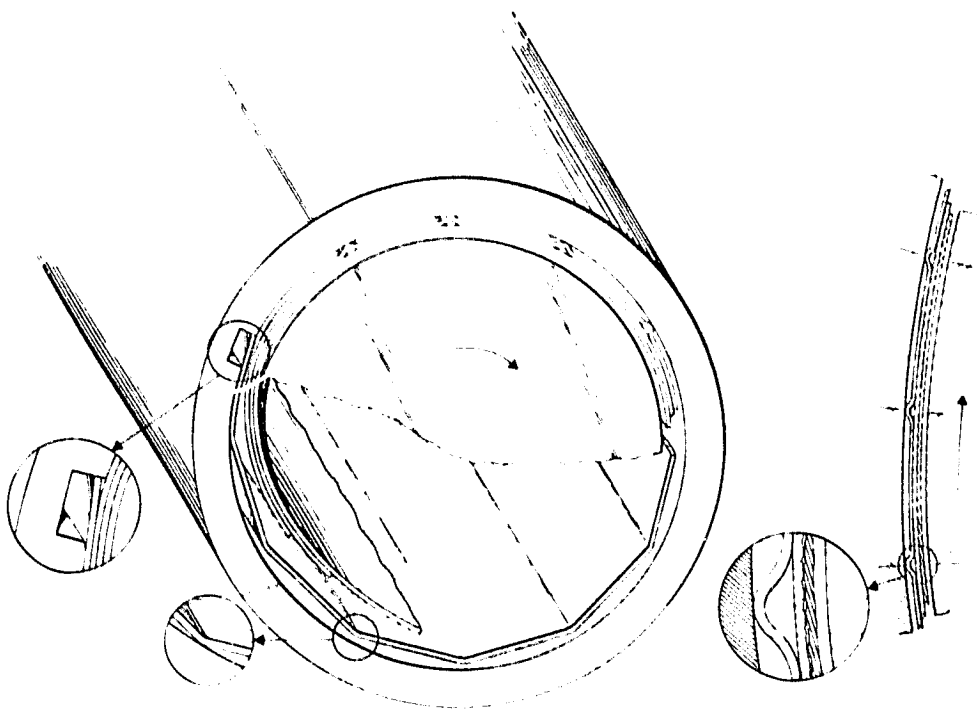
Schematic drawing of journal foil-bearing (Design B). Structure before and after insertion of journal is depicted. De-tails illustrate rounded vertices and retaining groove. (From ref. 58.)
